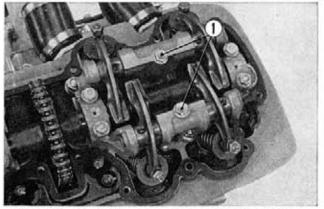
(1) Rocker arm shaft mounting bolts
